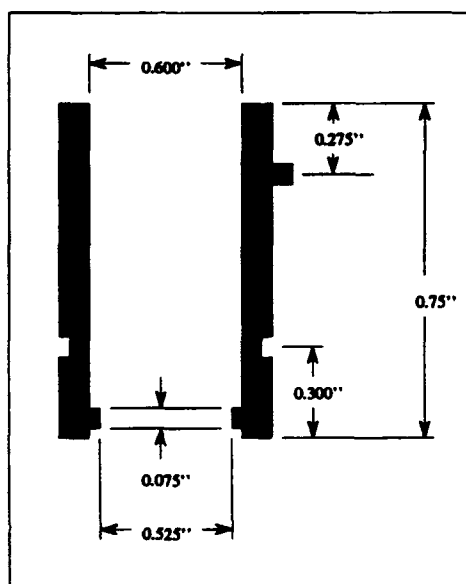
Cutaway of the implantable package cylinder for the brain chip.
